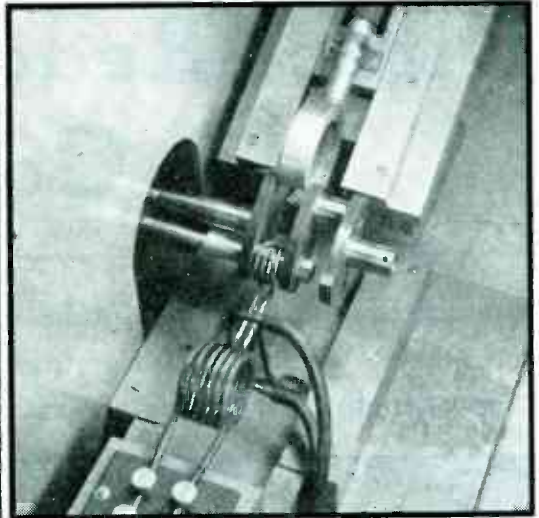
Heating and quenching arrangement for hardening the bearing surfaces of a crankshaft. An air-core transformer feeds the work coil
